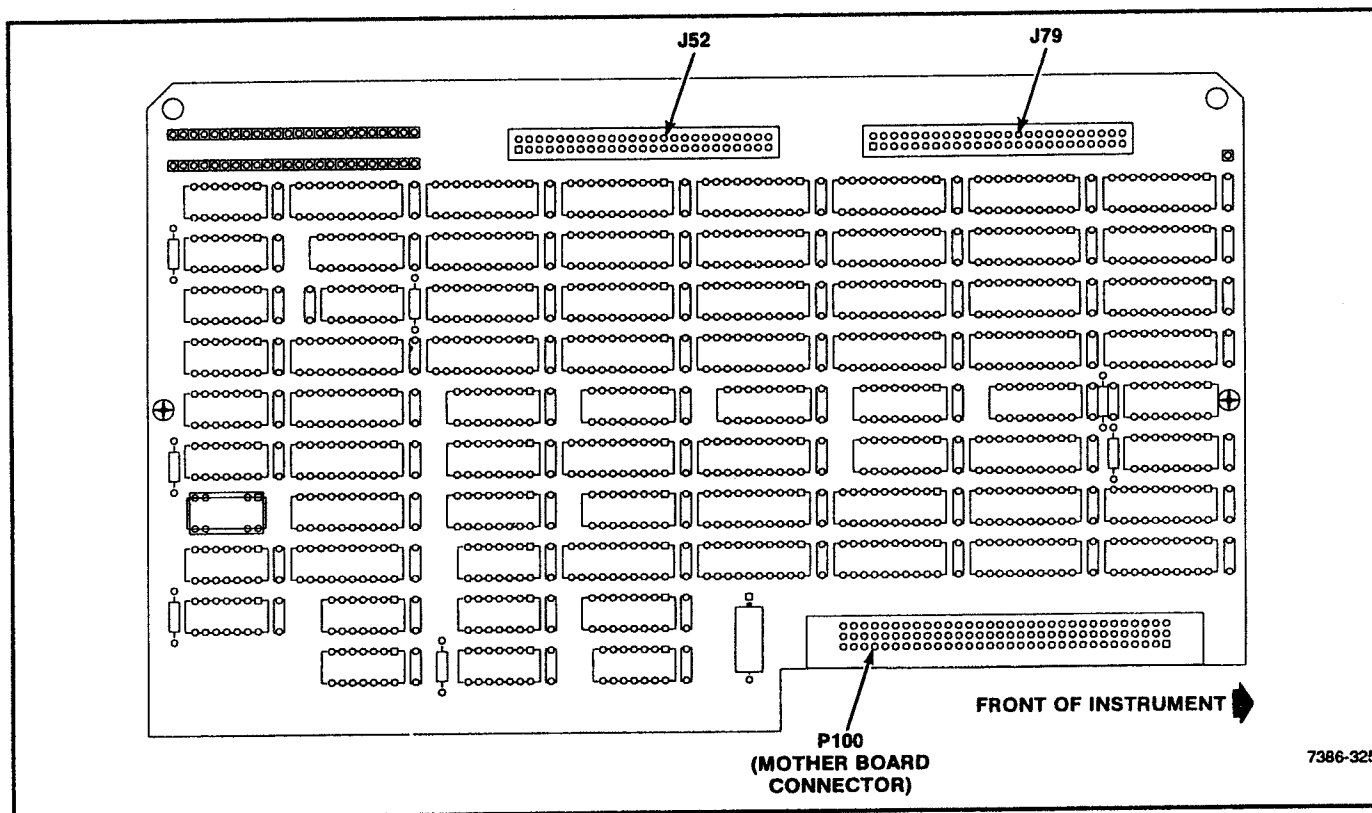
Connector locations for removal of the A16 Waveform Compressor board.
